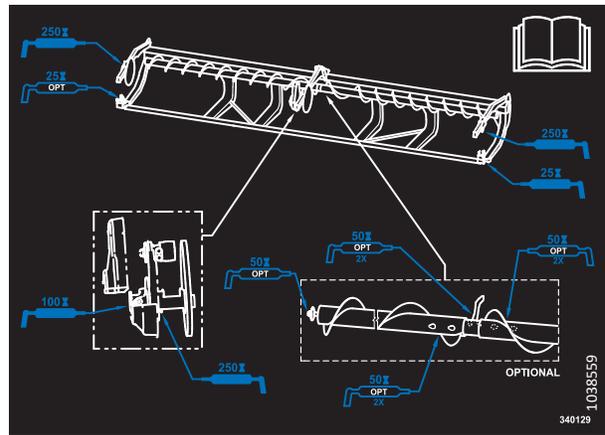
Decal for Double-Knife Header with Two-Piece Upper Cross Auger
